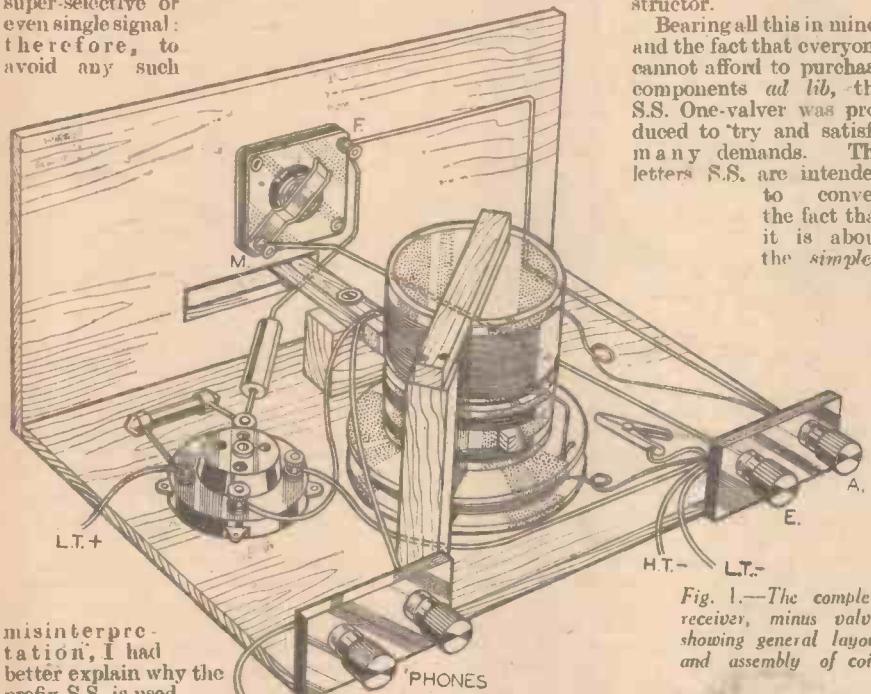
The complete receiver, minus valve, showing general layout and assembly of coil.
